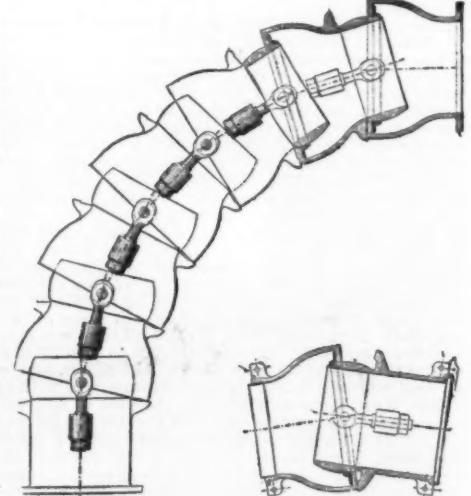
DETAILS OF THE JANDIN JOINTED CONDUIT.
